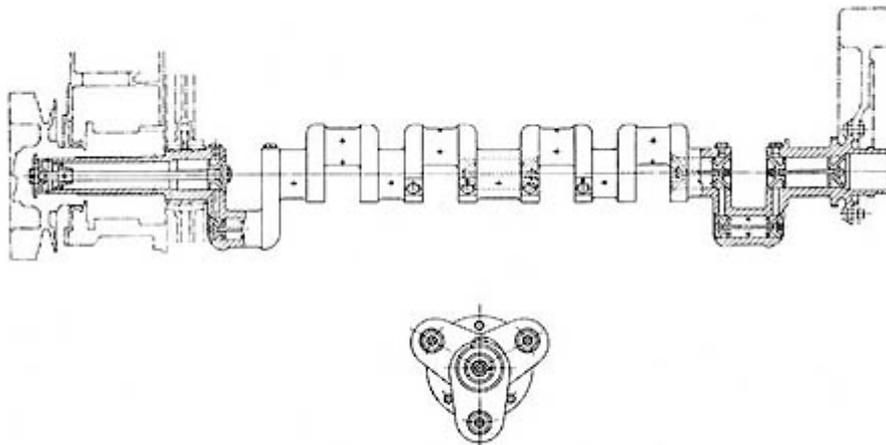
Arrangement of crankshaft 'Gothawk I'
